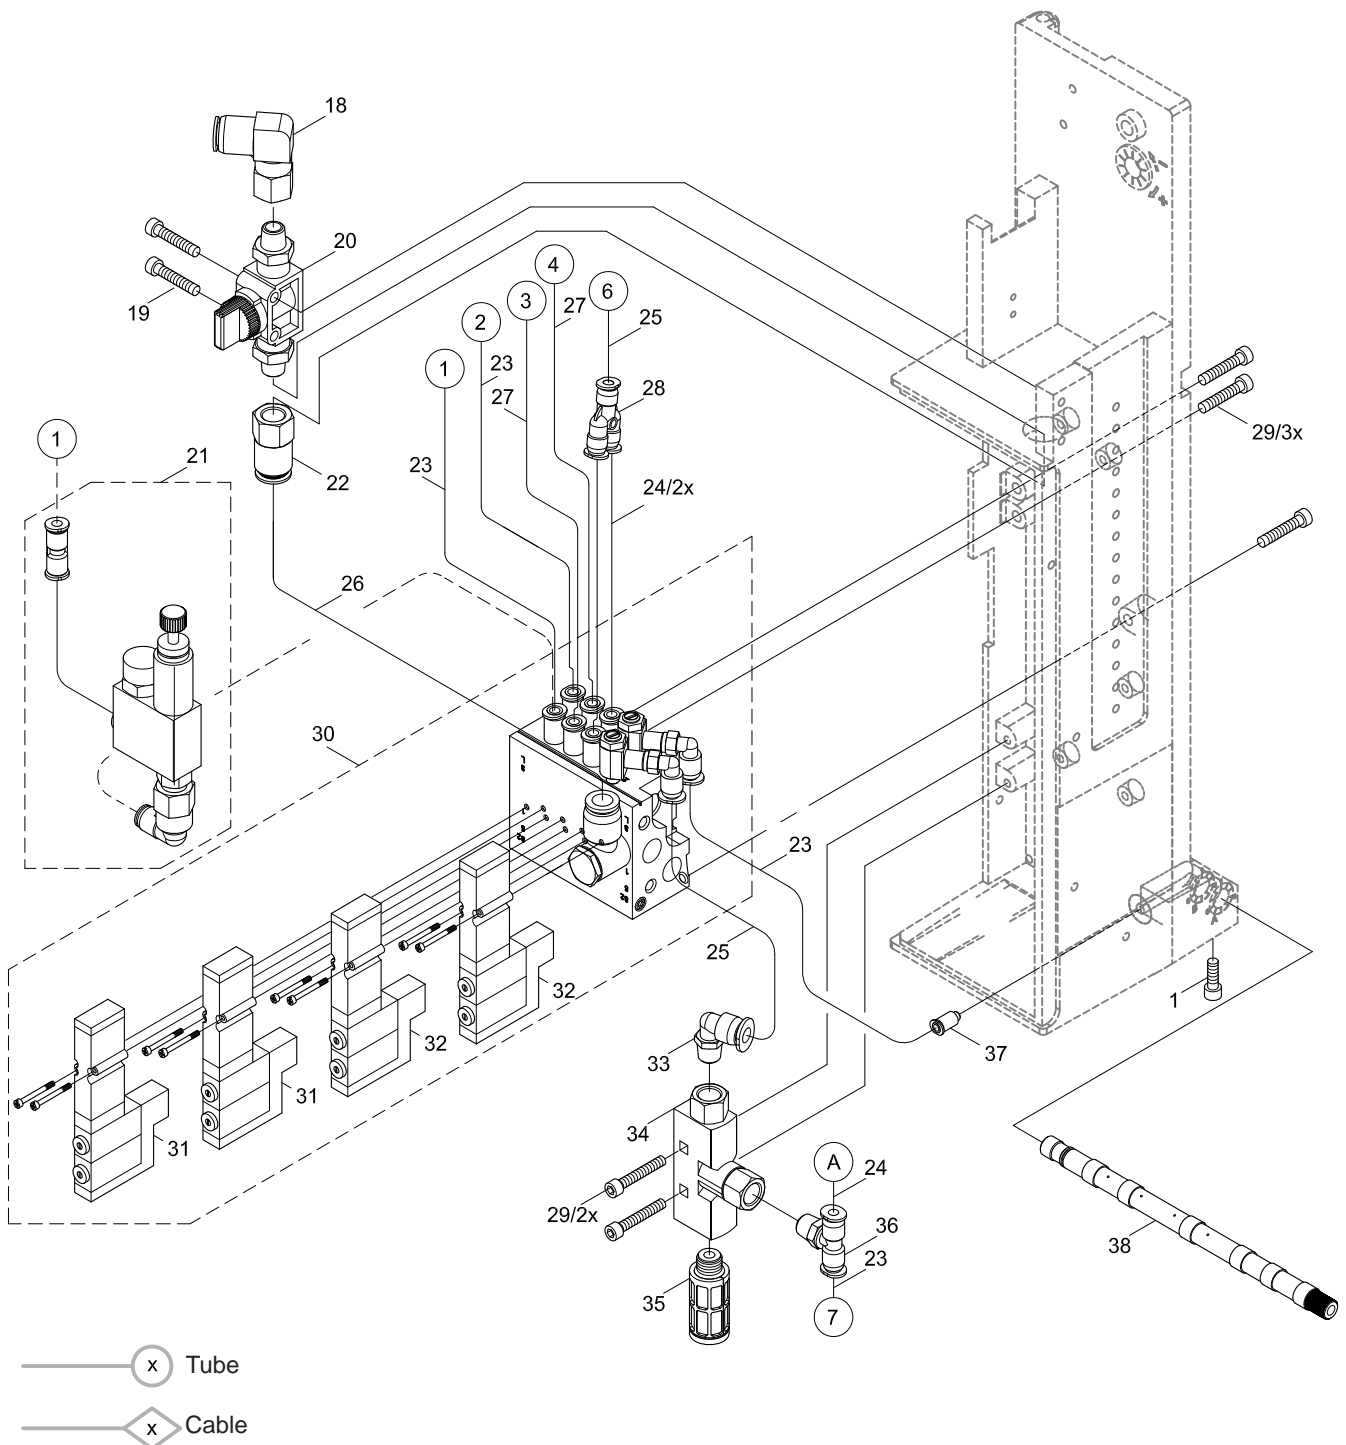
Pneumatics Retainer Assembly - Spare Parts
